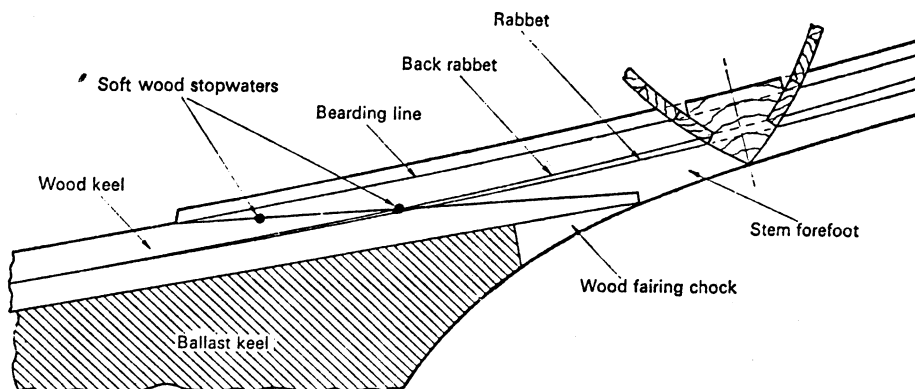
Typical scarph connecting stem to wood keel
